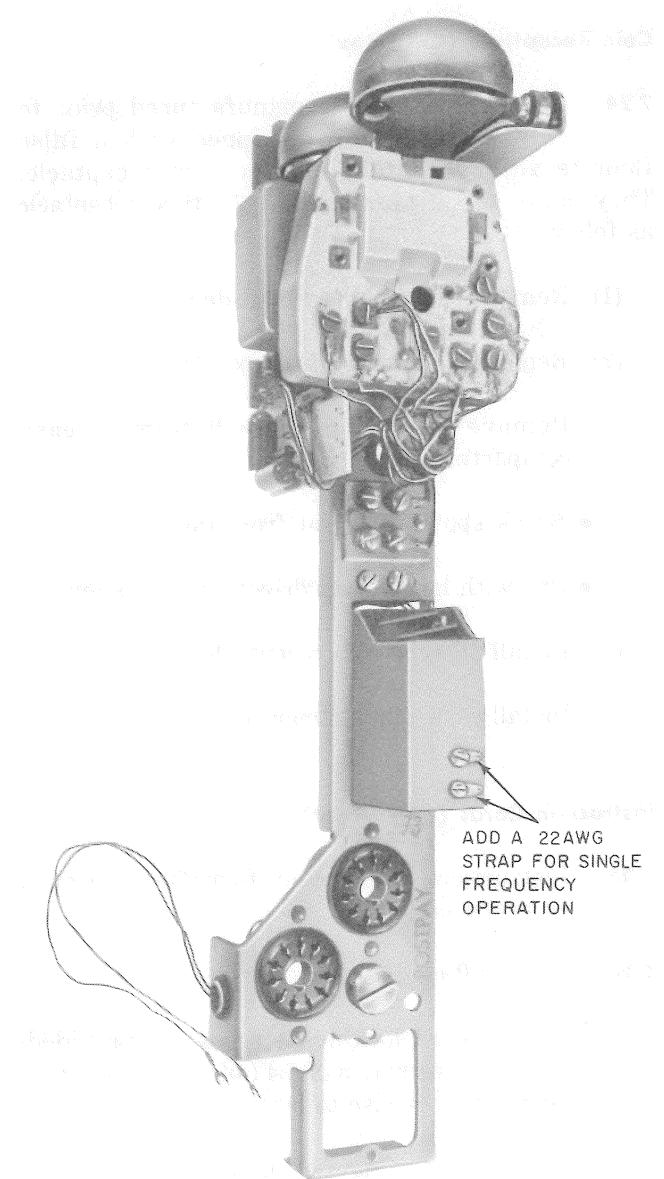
30B Coin Chassis—For Use in 1E-Type Sets
